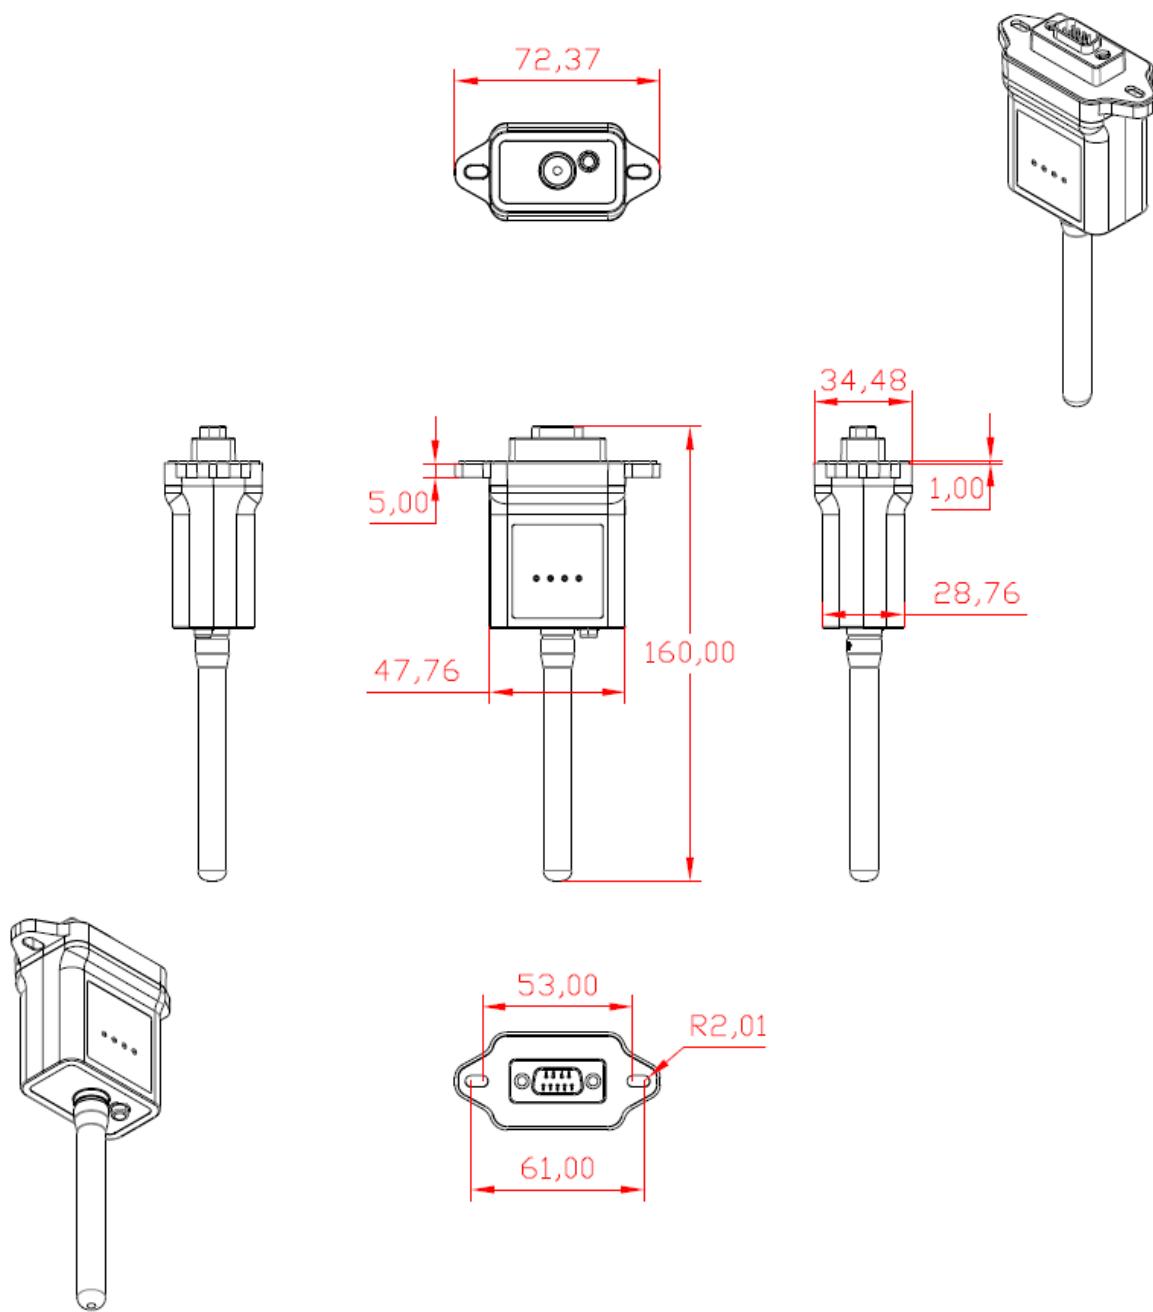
Solar Plug-SGB1-23/-24/-25 Mechanical Dimensions
